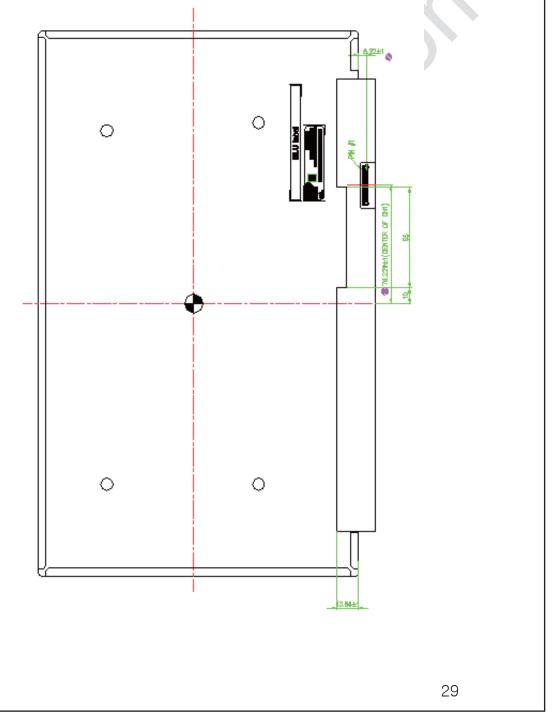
TFT-LCD Module Outline Dimension (Front View)
